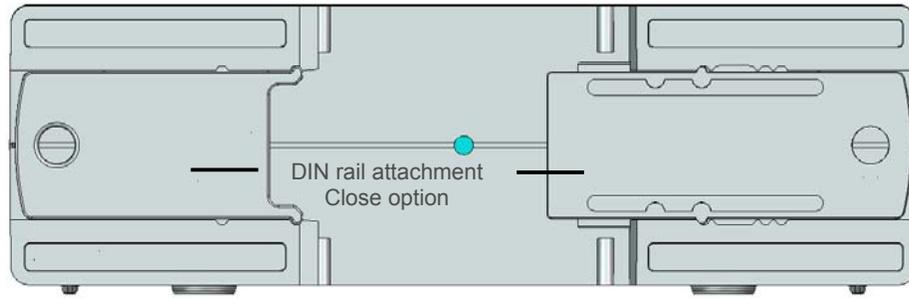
EZ863 Terminal rear view 1- DIN rail attachment close
